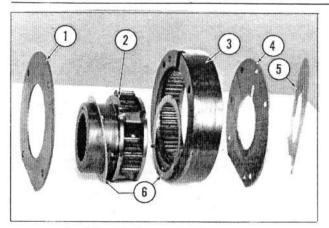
Dual Range Planetary Assembly (Identification and Sequence of Parts)
